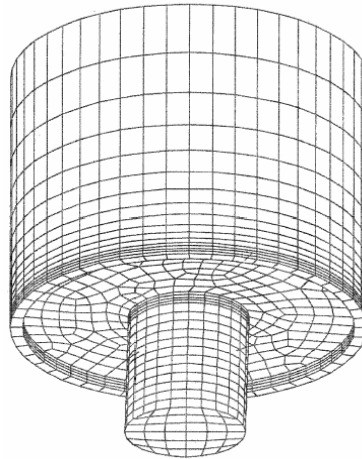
Enlarged view of Ulysse FSW tool FE mesh. [23]
